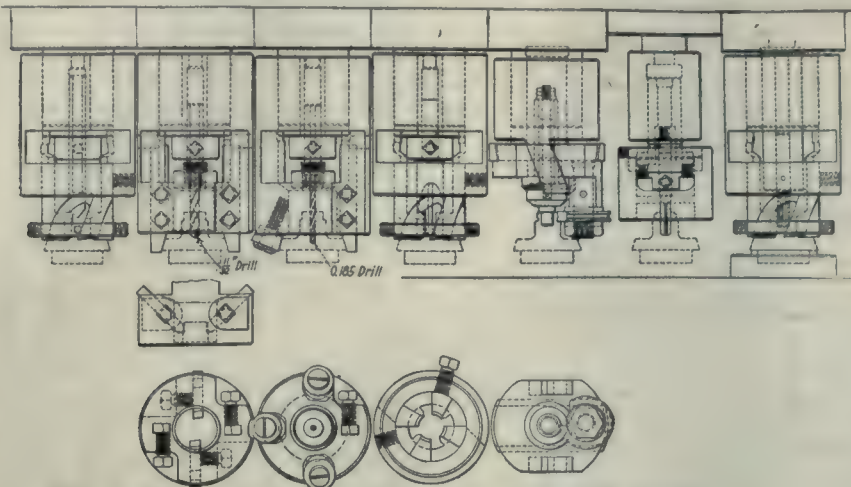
TOOL LAYOUT FOR MACHINING TIME FUSE HEAD.
